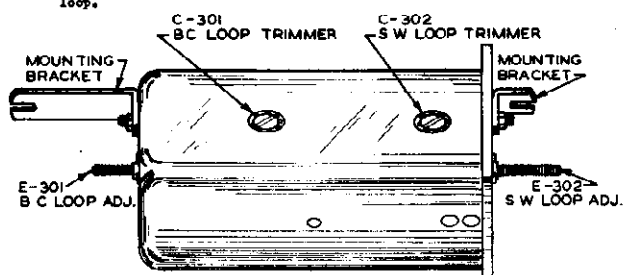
COUPLER SHOWING TRIMMER LOCATION
